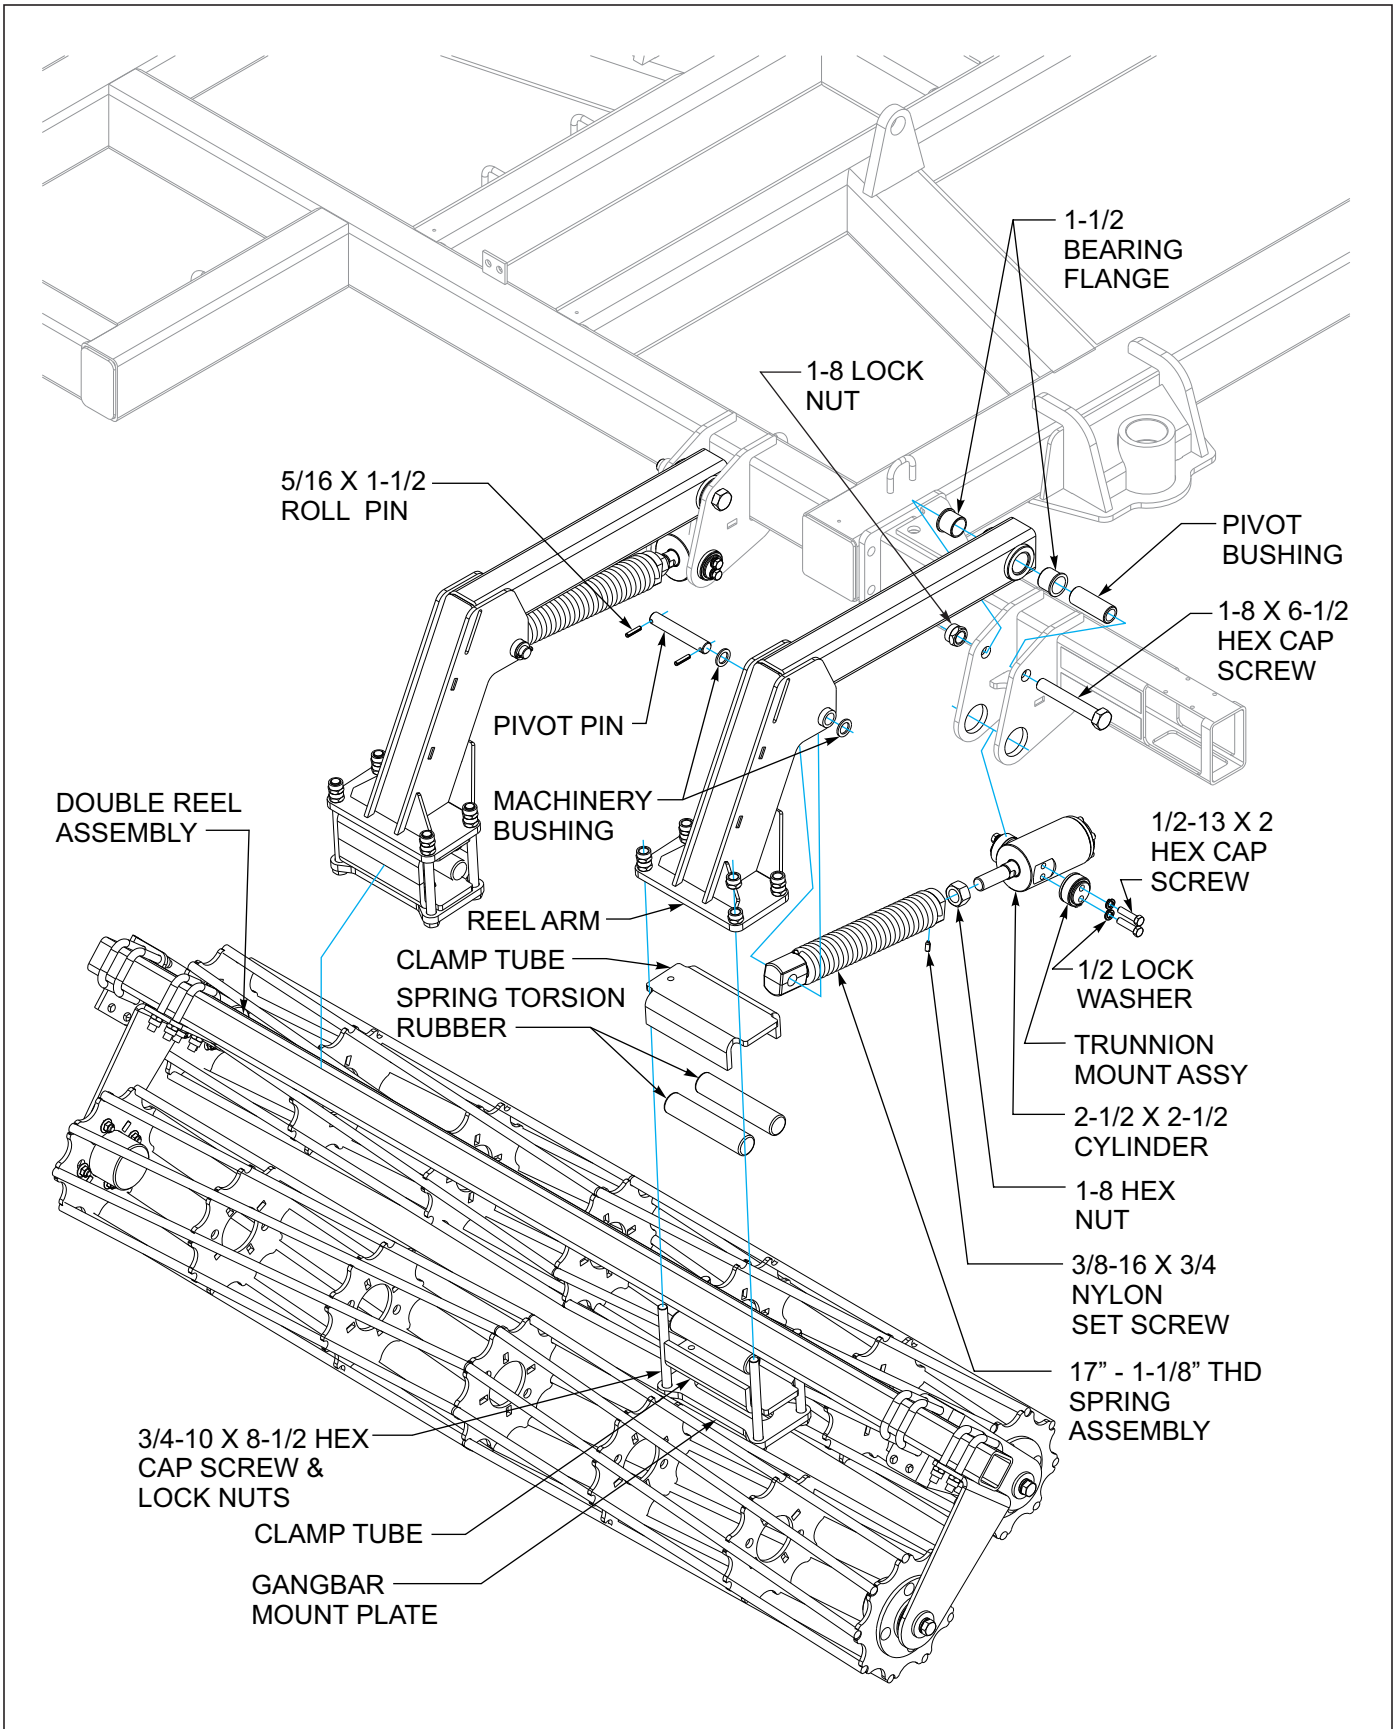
Hydraulic Conditioner Double Reel Installation 7510-14'
